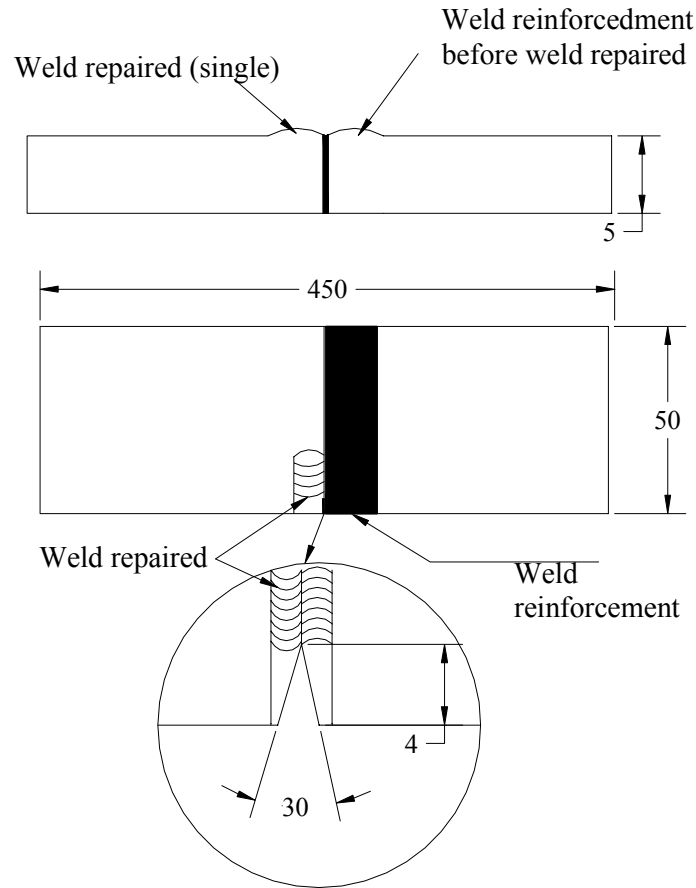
Fatigue crack test specimen geometry un-welded and weld-repaired specimens
